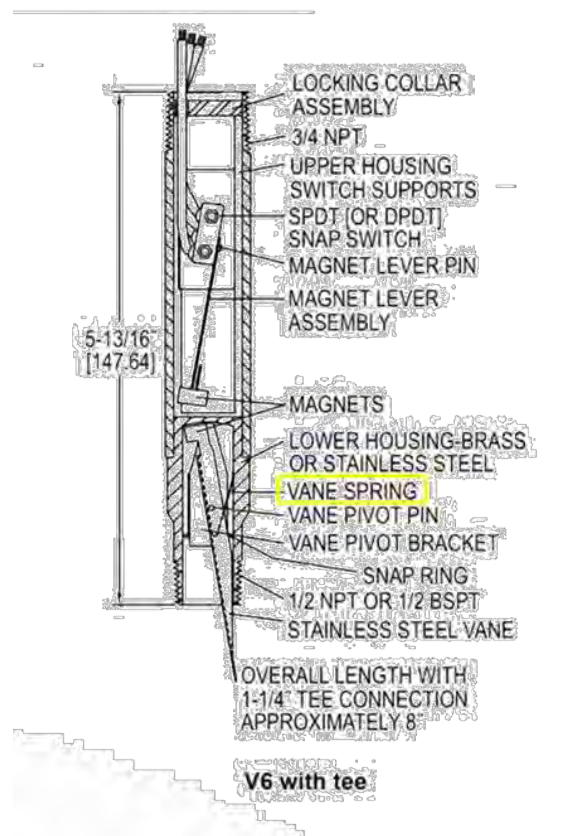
Section view of the Shower/Eyewash flow switch.
